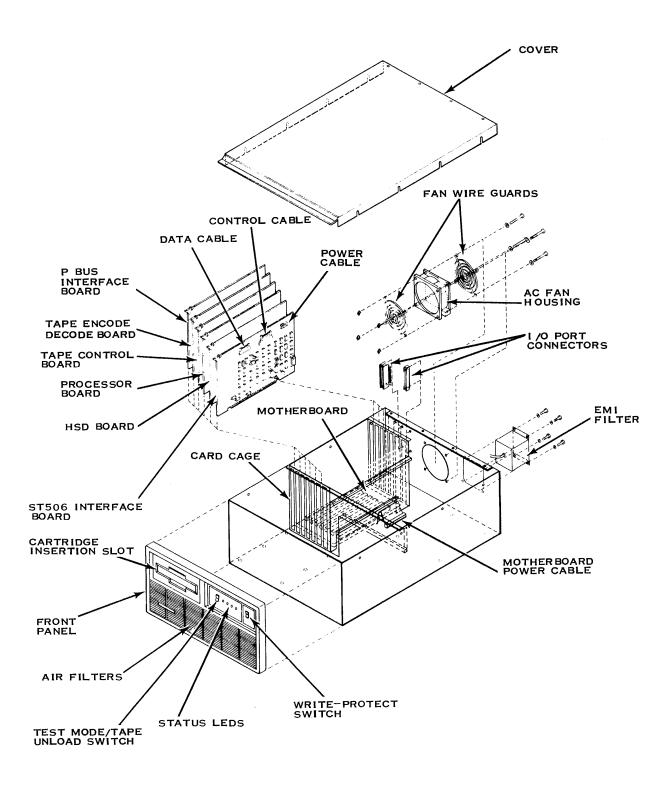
shows an exploded view of the WD800A mass storage system.
